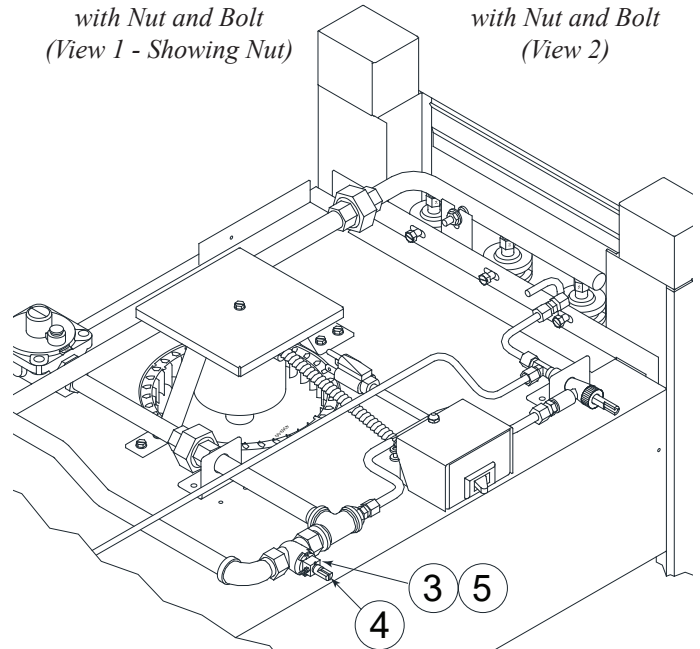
Underside of Gas Broiler (Counter top 25 Series Model shown)
